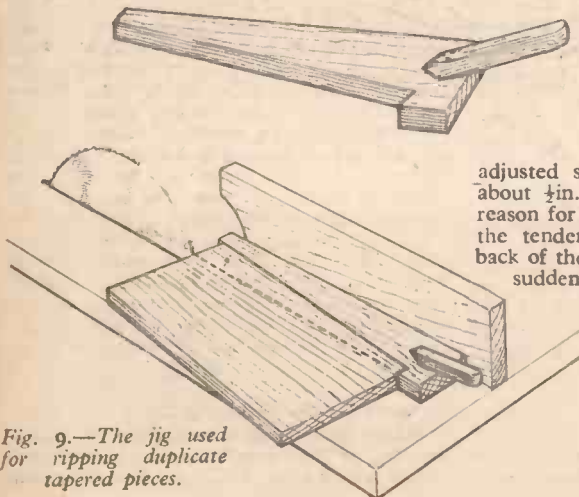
The jig used for ripping duplicate tapered pieces.
